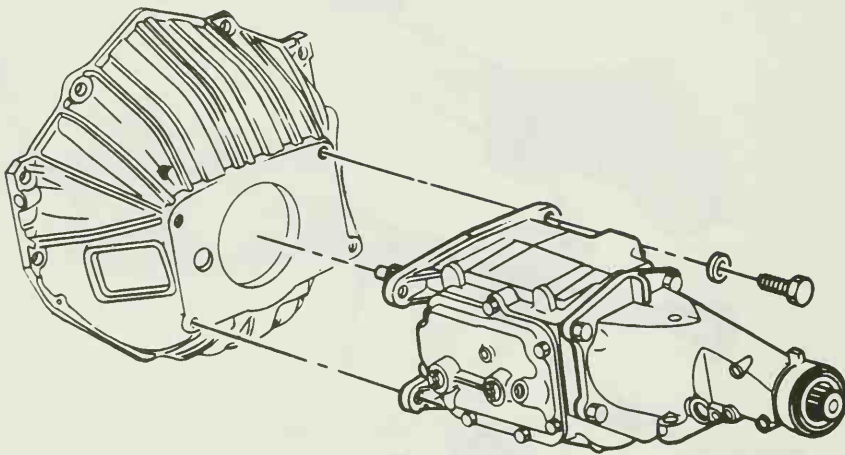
When the clutch housing bolts are removed, the transmission is moved straight back. (GMC Truck and Coach Division of General Motors Corporation)
